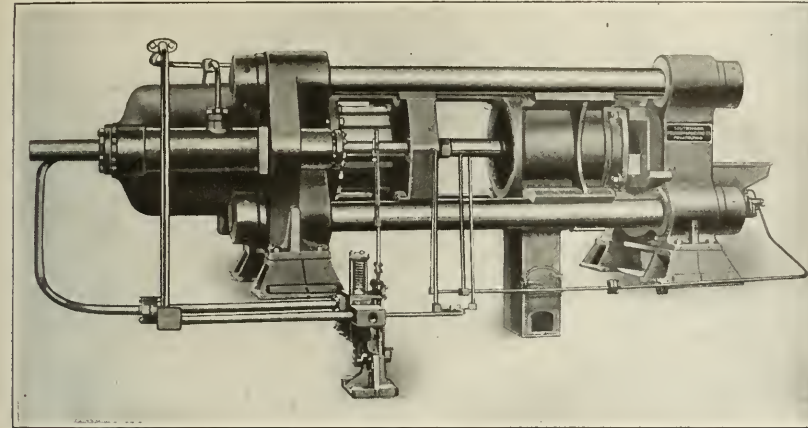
Hydraulic Extrusion Press (1000 Tons Capacity) with Heater for Billet Container
